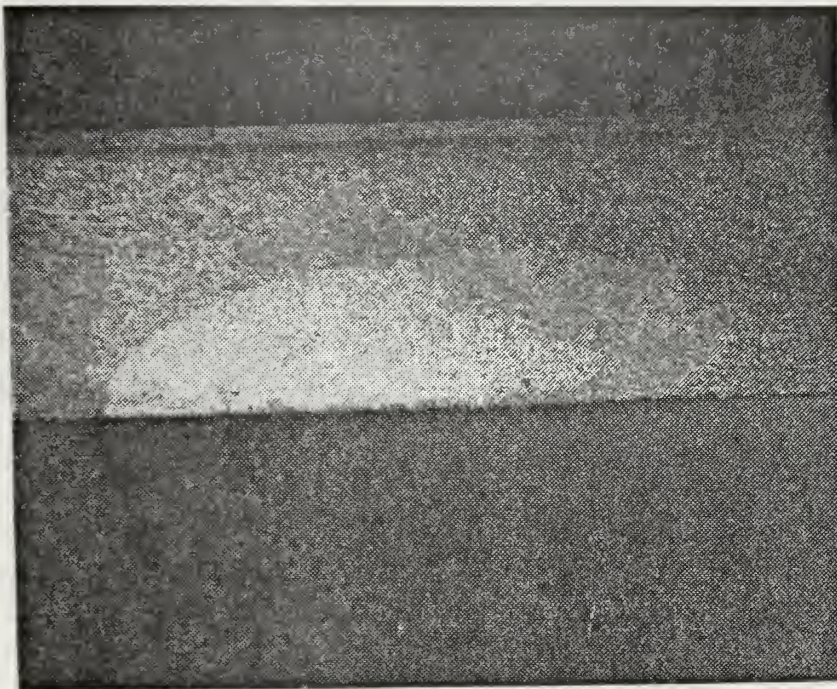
Macro-fractograph of specimen RI-1-4, which was under lower stress than the RI-1-2 specimen in Fig. 77, showing a still larger fatigue zone than Fig. 77. This specimen was fractured after 271,100 cycles at 55 ksi. X10.
